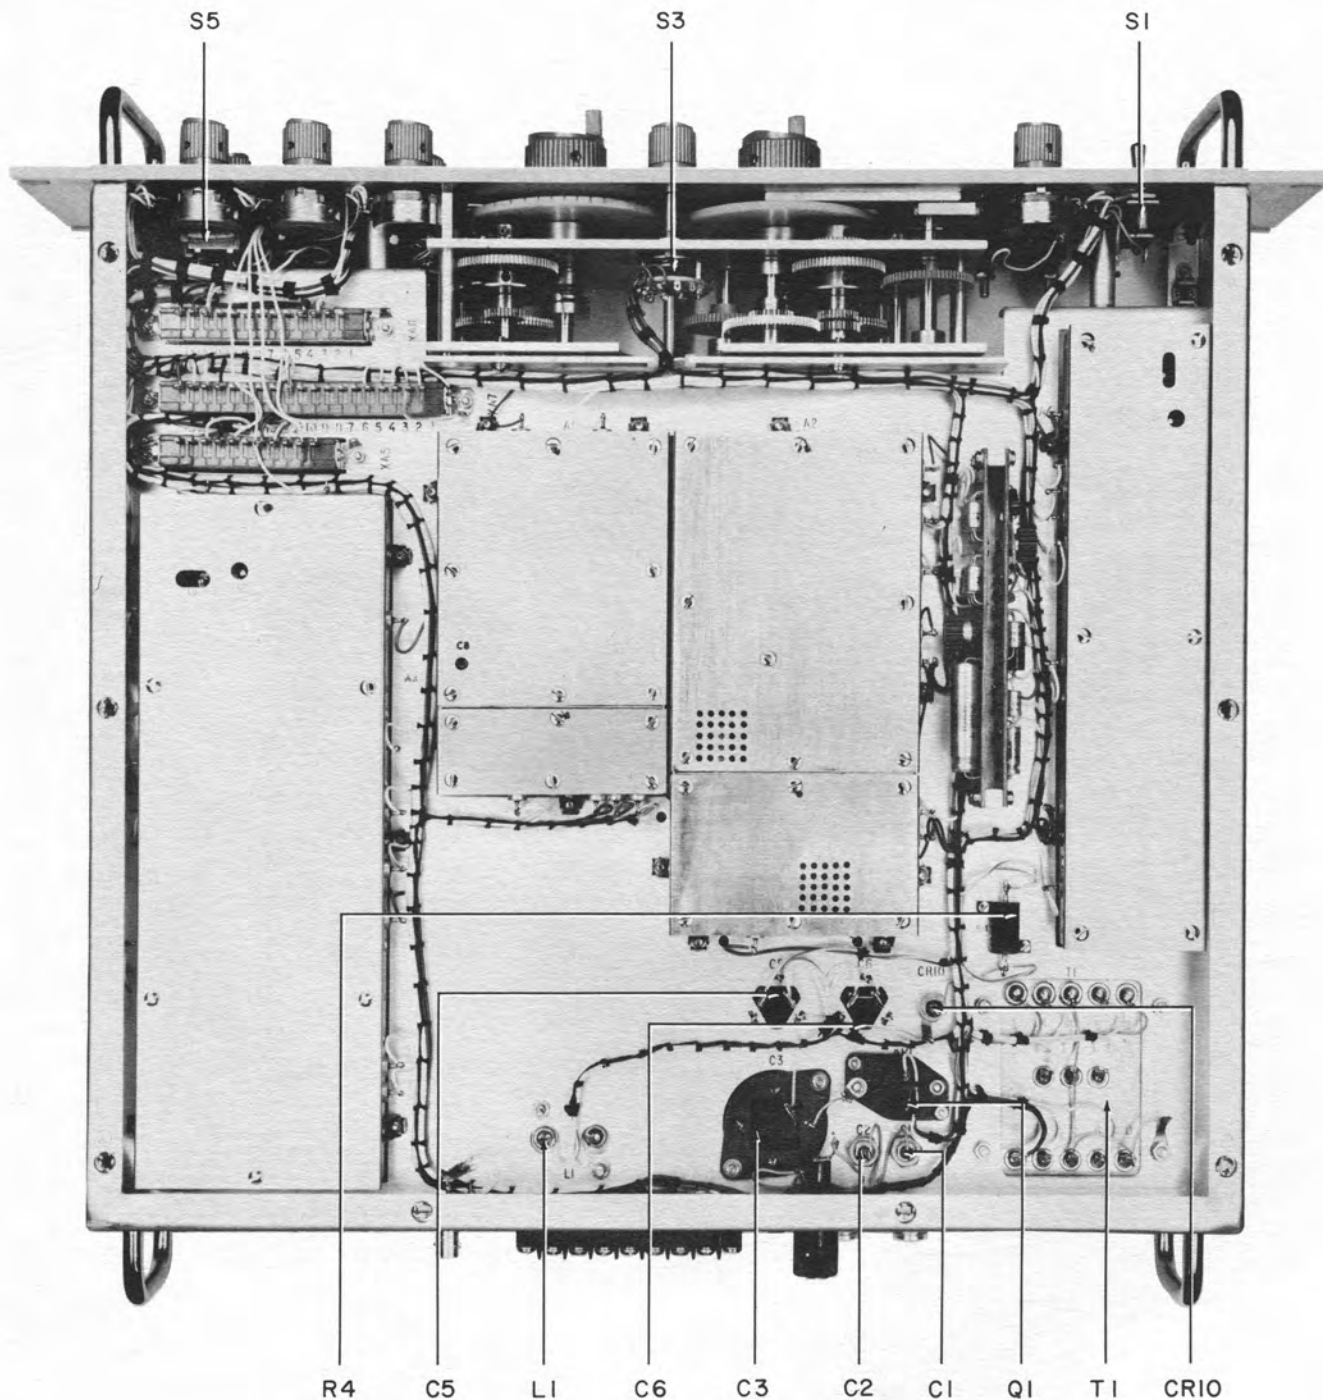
Type 970A Receiver, Bottom View, Component Locations
